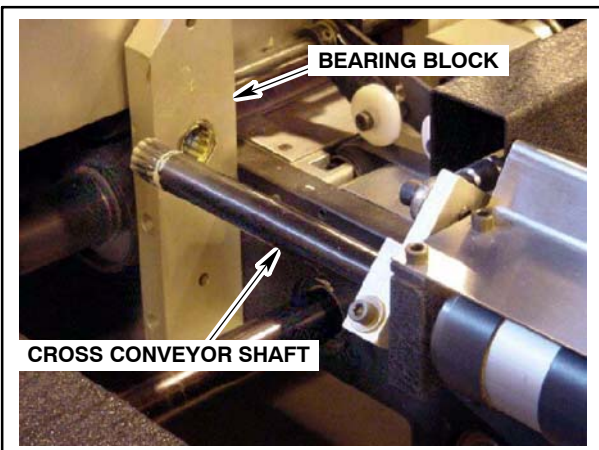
Insert Cross Conveyor Shaft Into Bearing Block
